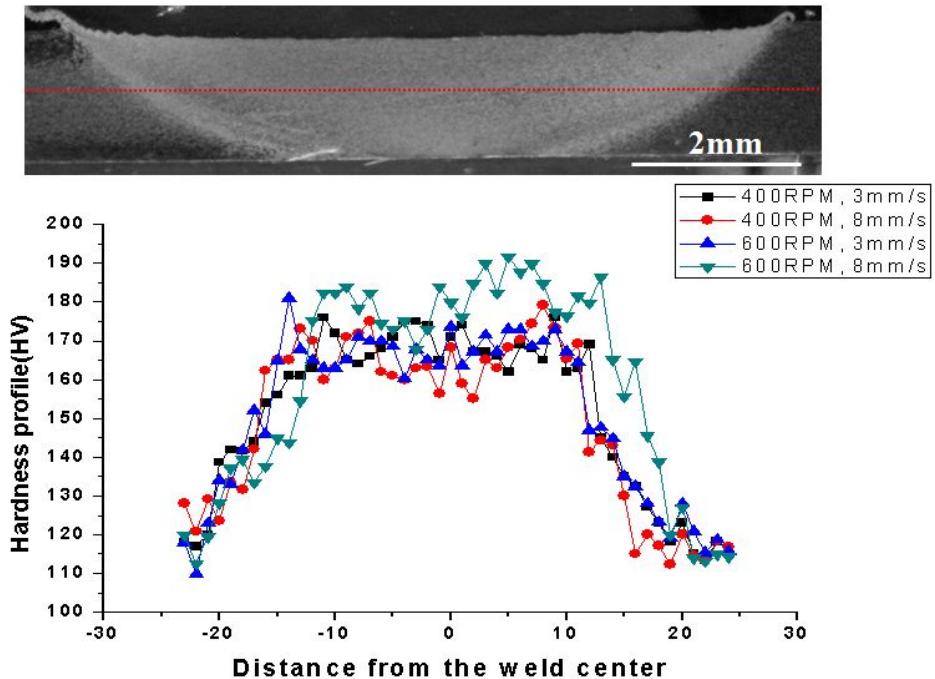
5 Hardness profile of Friction stir welded SS400
